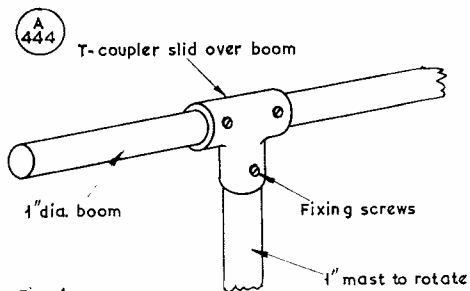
Coupling the boom to the mast. TV-type fittings, or plumber's piping, can be very useful here.
